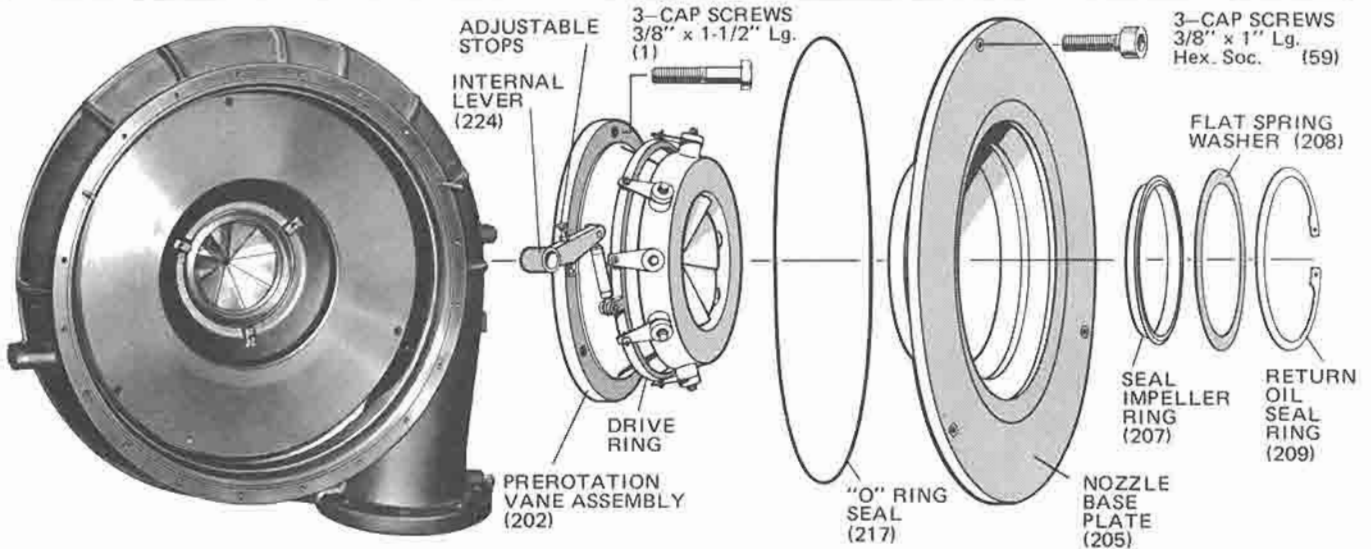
ROTOR SCROLL DISASSEMBLED — YTJ 67 THRU 95 AND YDTJ 67 THRU 95
